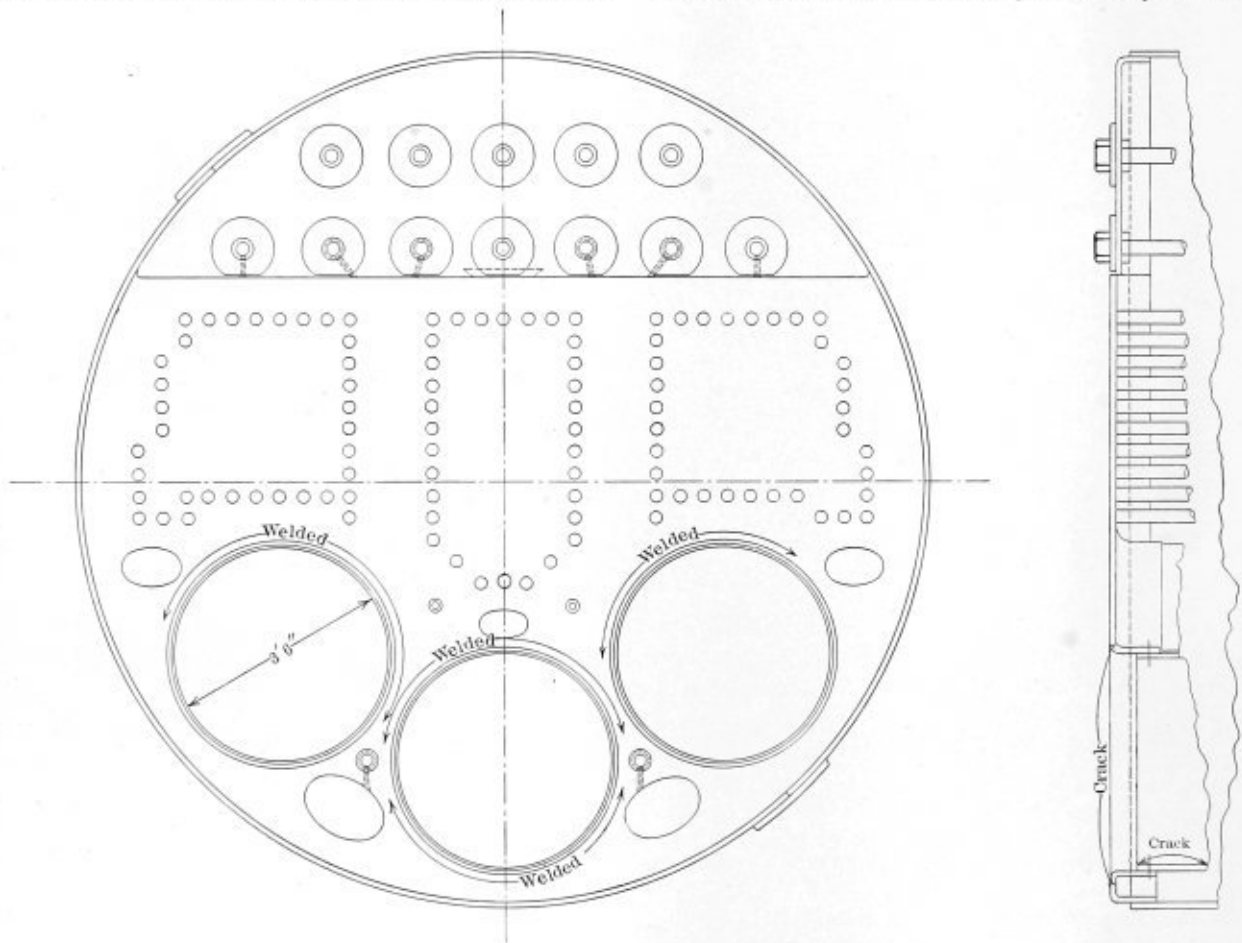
SKETCH SHOWING LOCATION OF CRACKS IN THE BOILER.
